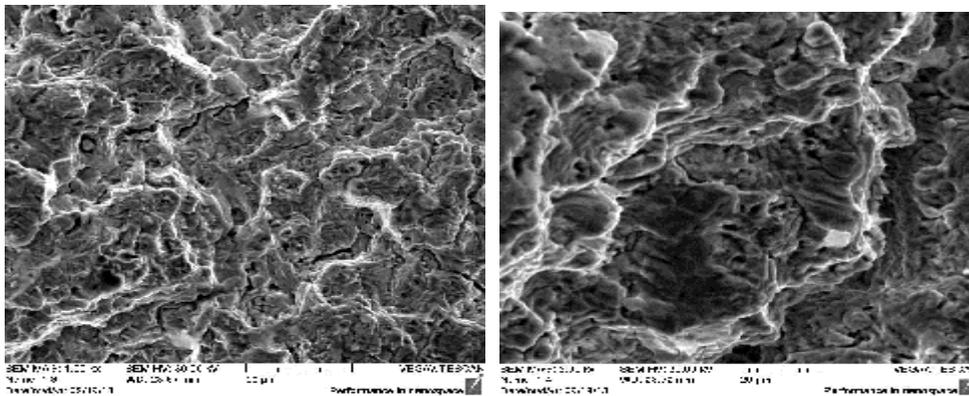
shows a typical ductile fatigue fracture micrograph for steel alloy CK35
